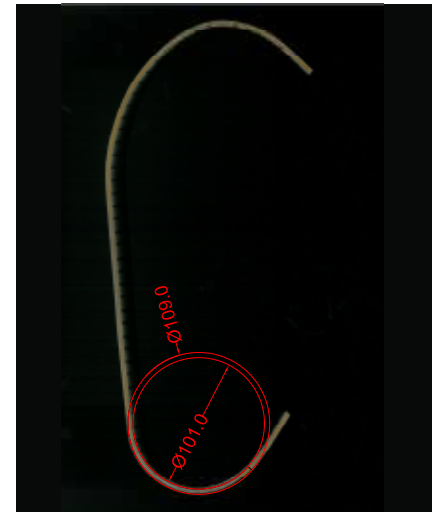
+1mm rolled, welding beads across rolling direction outside
